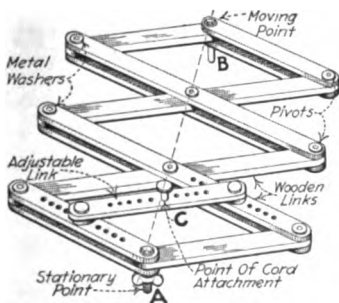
Adjustable pantograph for indicator-reducing use.
